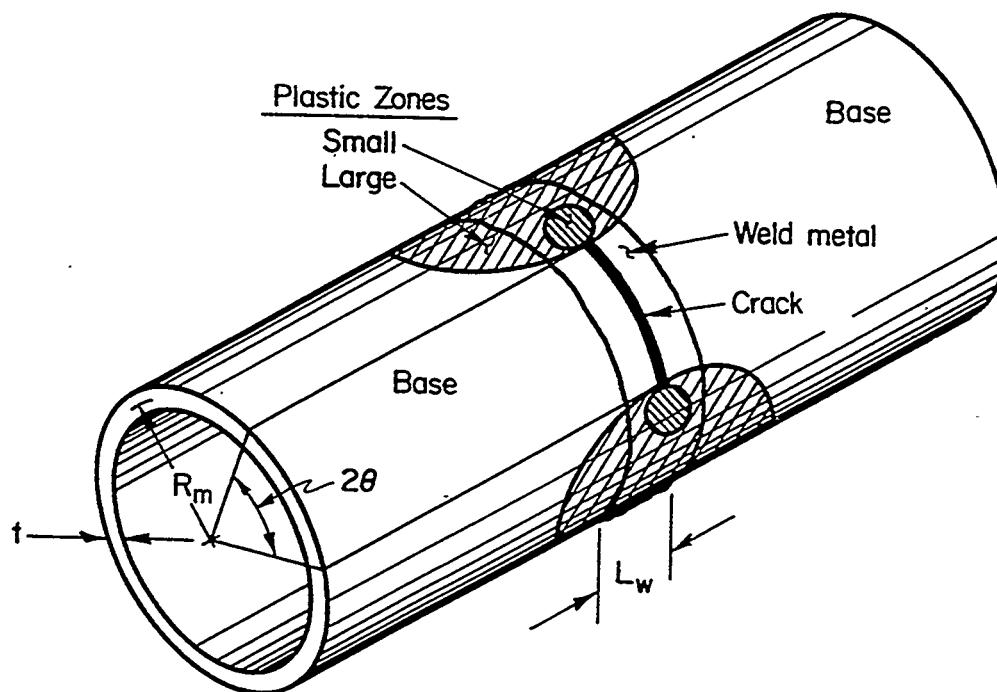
Circumferential through-wall crack in a weld showing plastic-zone sizes
